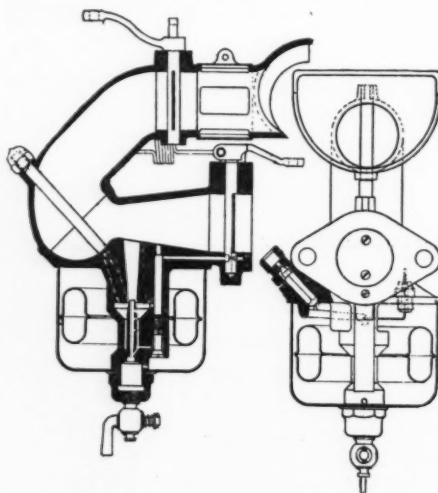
Two views of the new model L Carter, a multiple jet type having a single nozzle, the fuel passing out through holes in the nozzle
